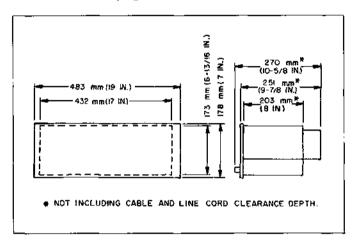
SR105 POWER AMPLIFIER DIMENSIONAL OUTLINE DRAWING
